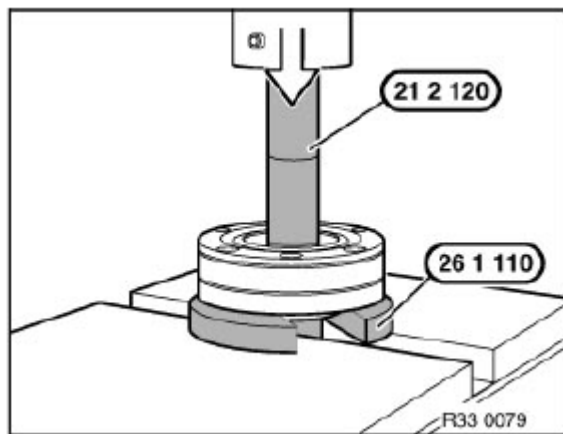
Pressing Splined Shaft Using Special Tool (21 2 120)
